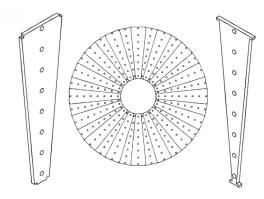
Solid-works design of 3D printed UCA Male(Left)-Female(Right).
